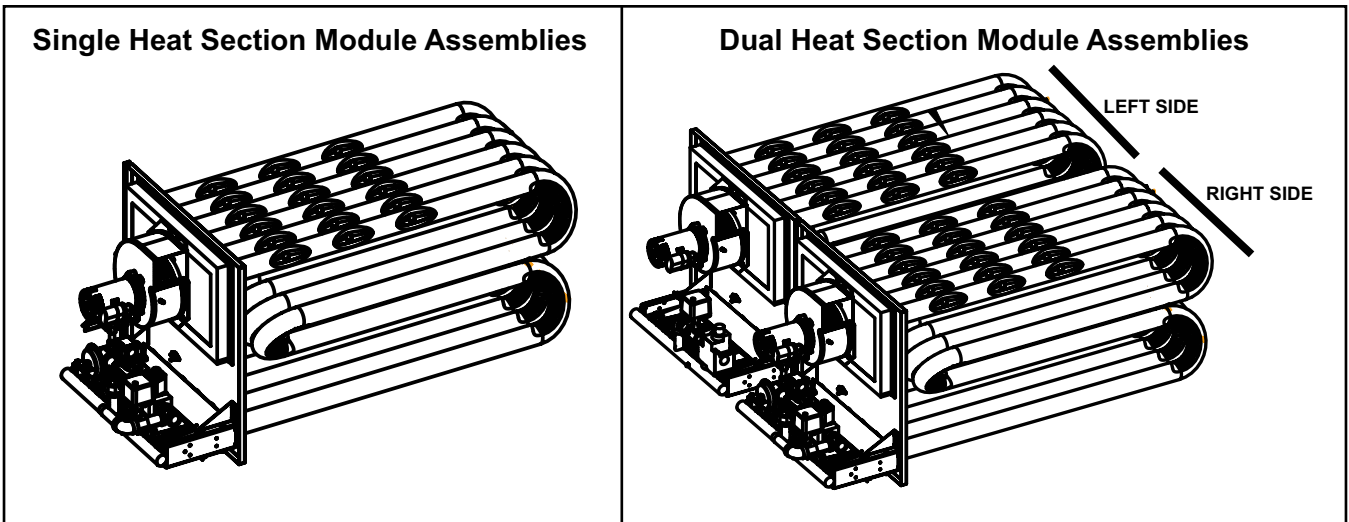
Heat Section Module Assemblies (Refer to [Table 17](#))
